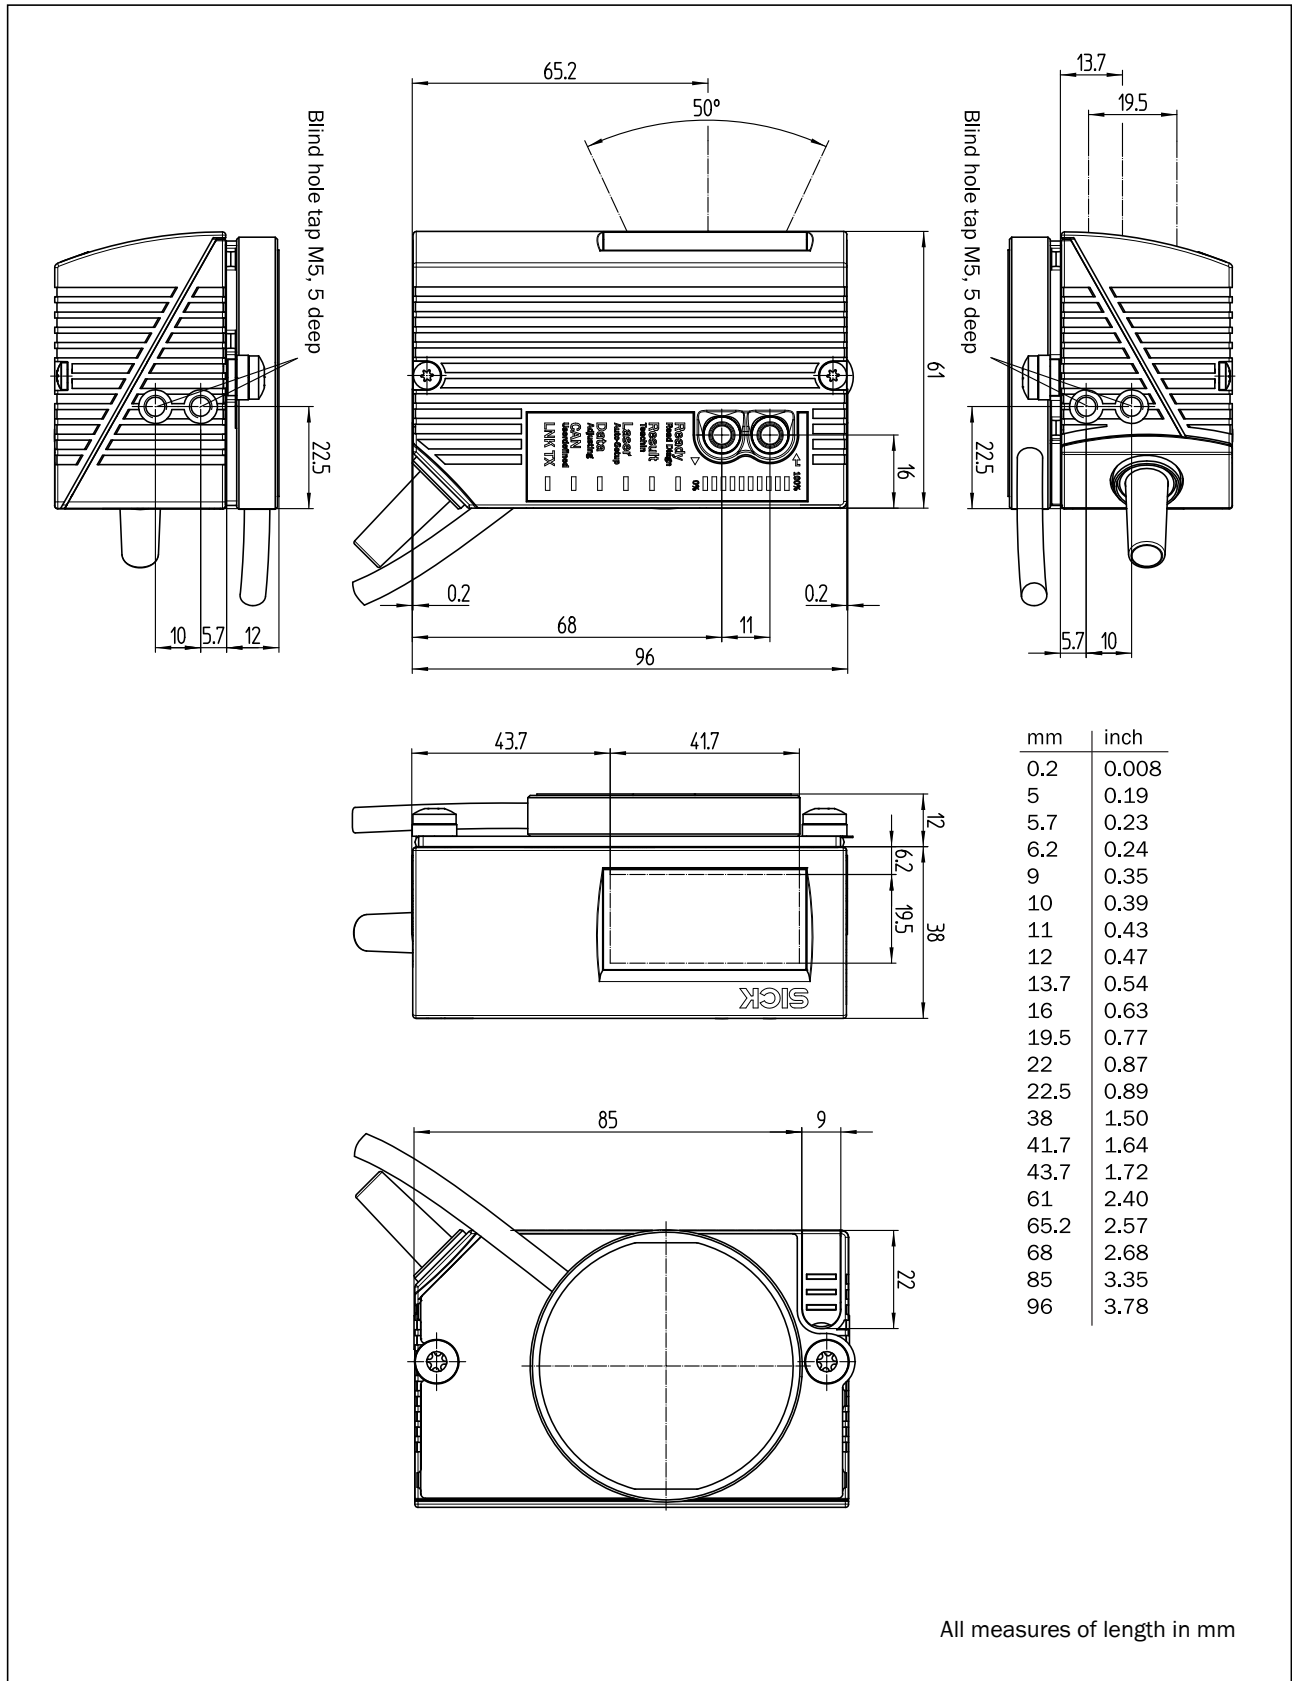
Dimensions of the line/raster scanner with heating and front end reading window
